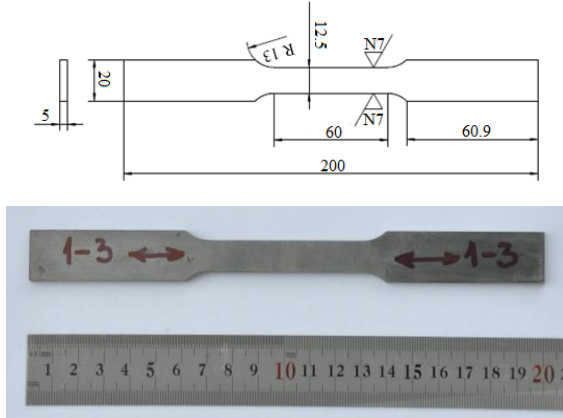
Shape and dimensions of the investigated flat S355 specimen
